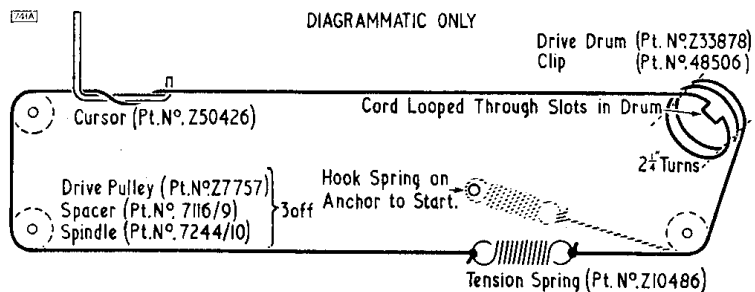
Tuning drive cord viewed from front of chassis with gang fully closed. Use 30 inches of nylon braided cord.
